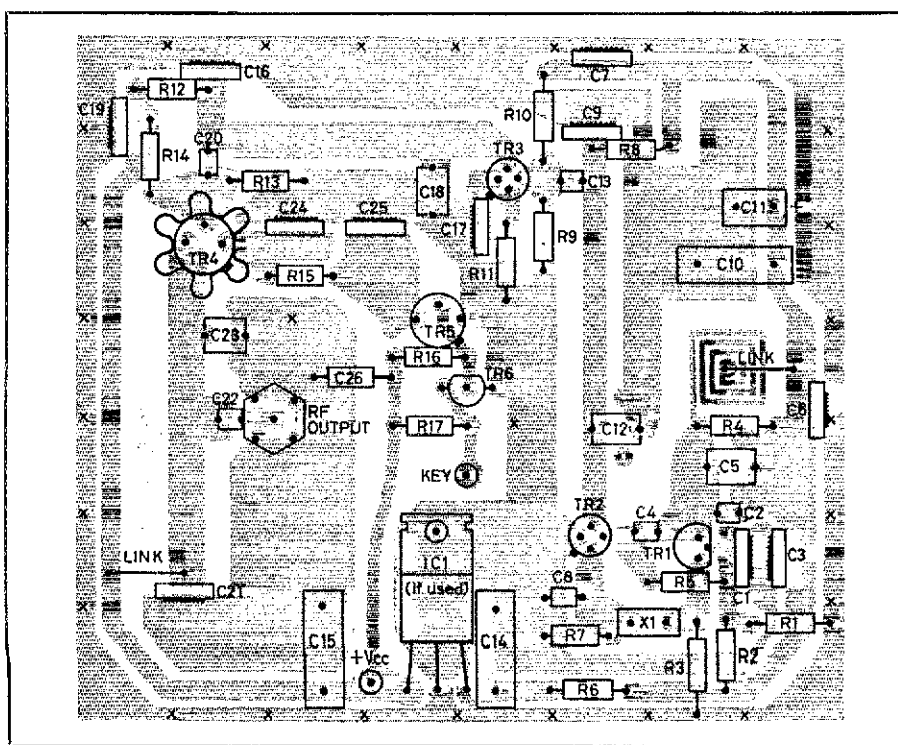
Parts-placement guide for the signal source. Parts are placed on the ground plane side of the board. (The etching patterns for both sides of the board appear in the Hints and Kinks section of this issue.) X indicates jumpers joining top and bottom ground planes. [Several parts labeled on the diagram are not in QST style — Ed.]
